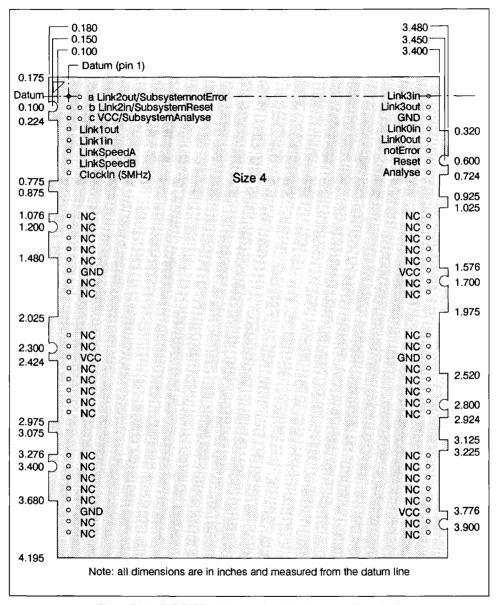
IMS B420 outline drawing (All dimensions in inches)
